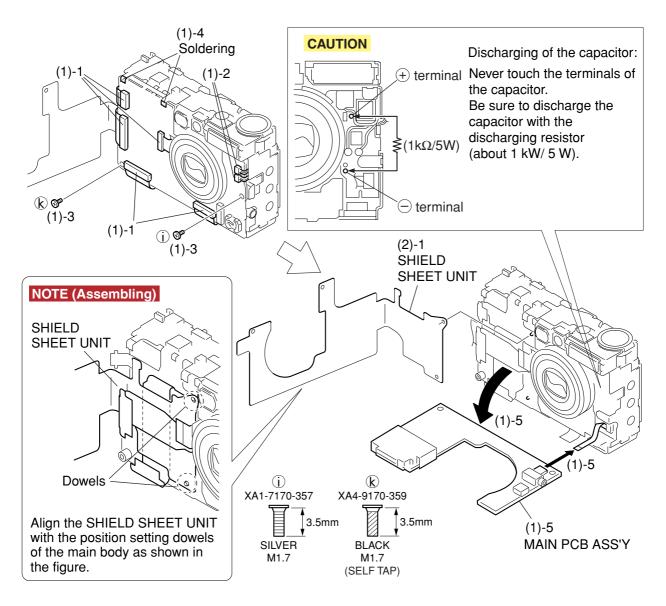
MAIN PCB ASS'Y, SHIELD SHEET UNIT
